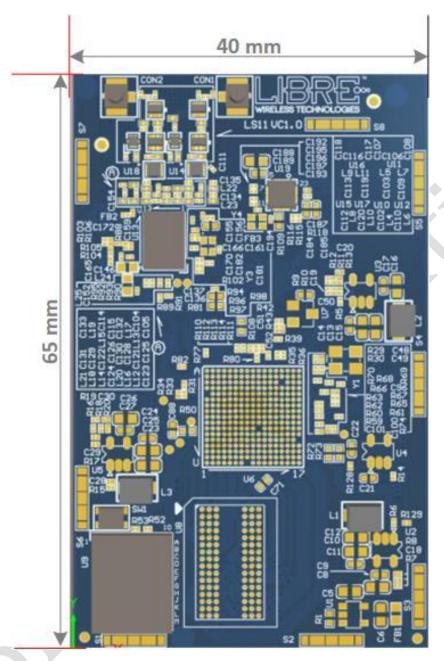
LS11 Top View - Mechanical Dimension 1
